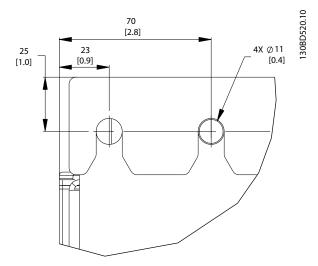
Top Mounting Hole Dimension Detail, D7h
